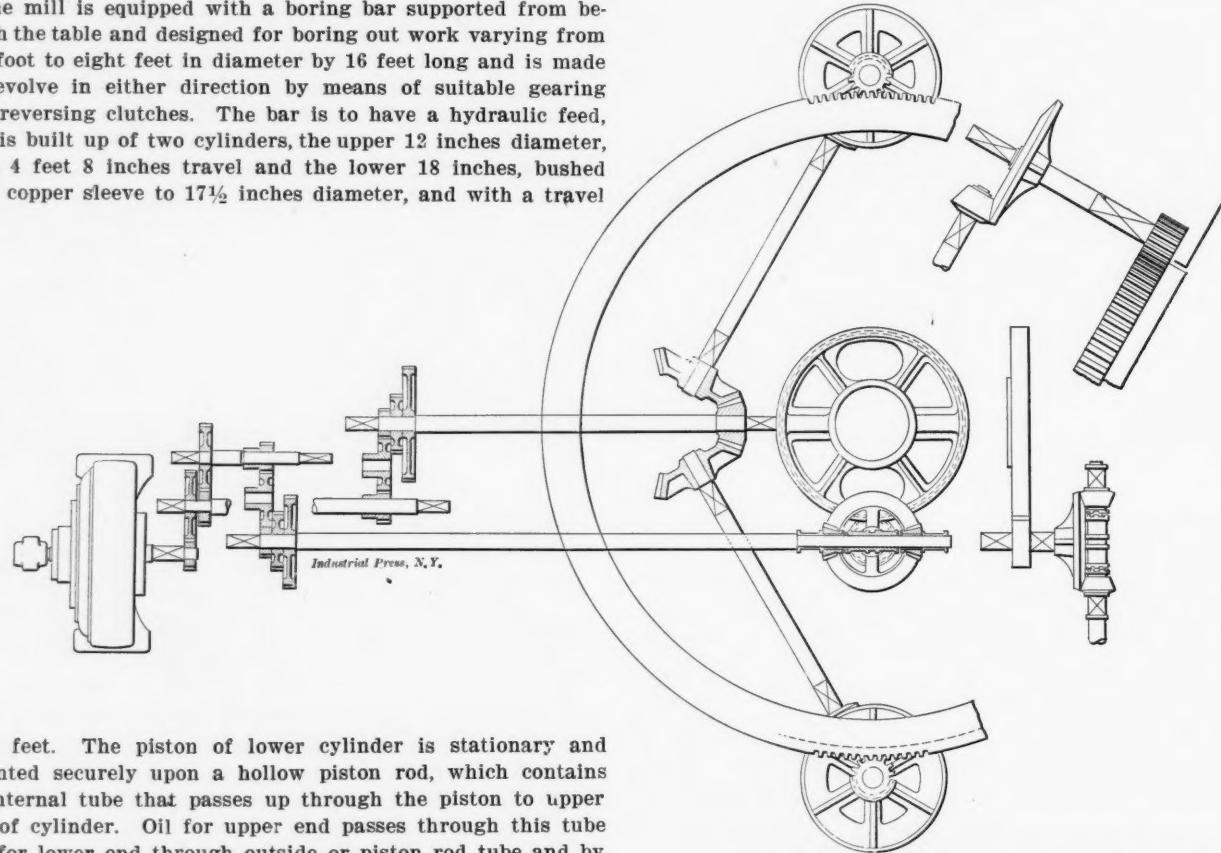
Plan of Drive for Boring Mill Table and for Boring Bar.
